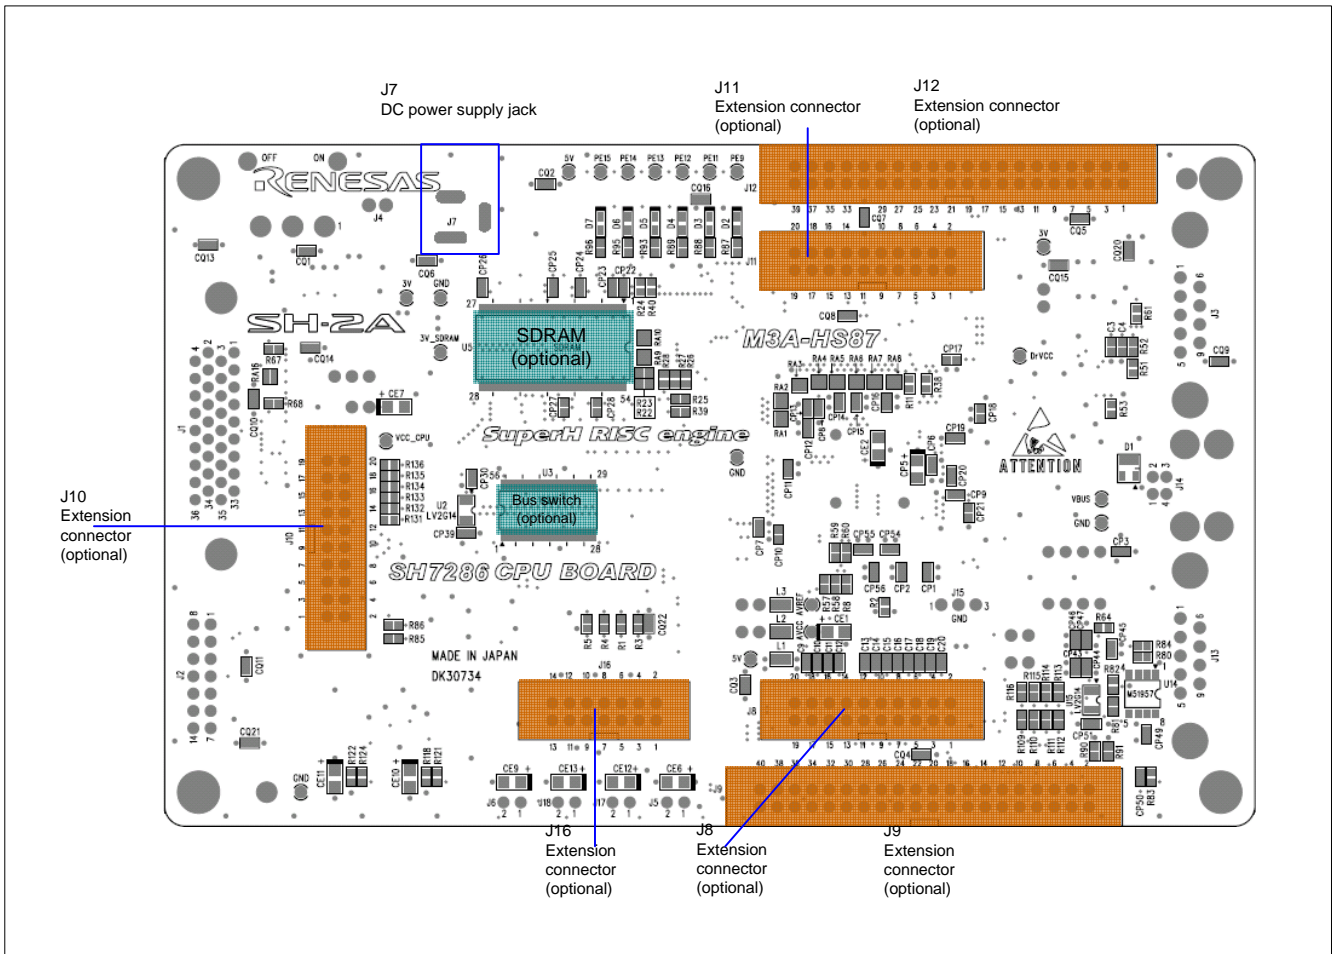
M3A-HS87 Major Components (Top View of the Solder Side)
